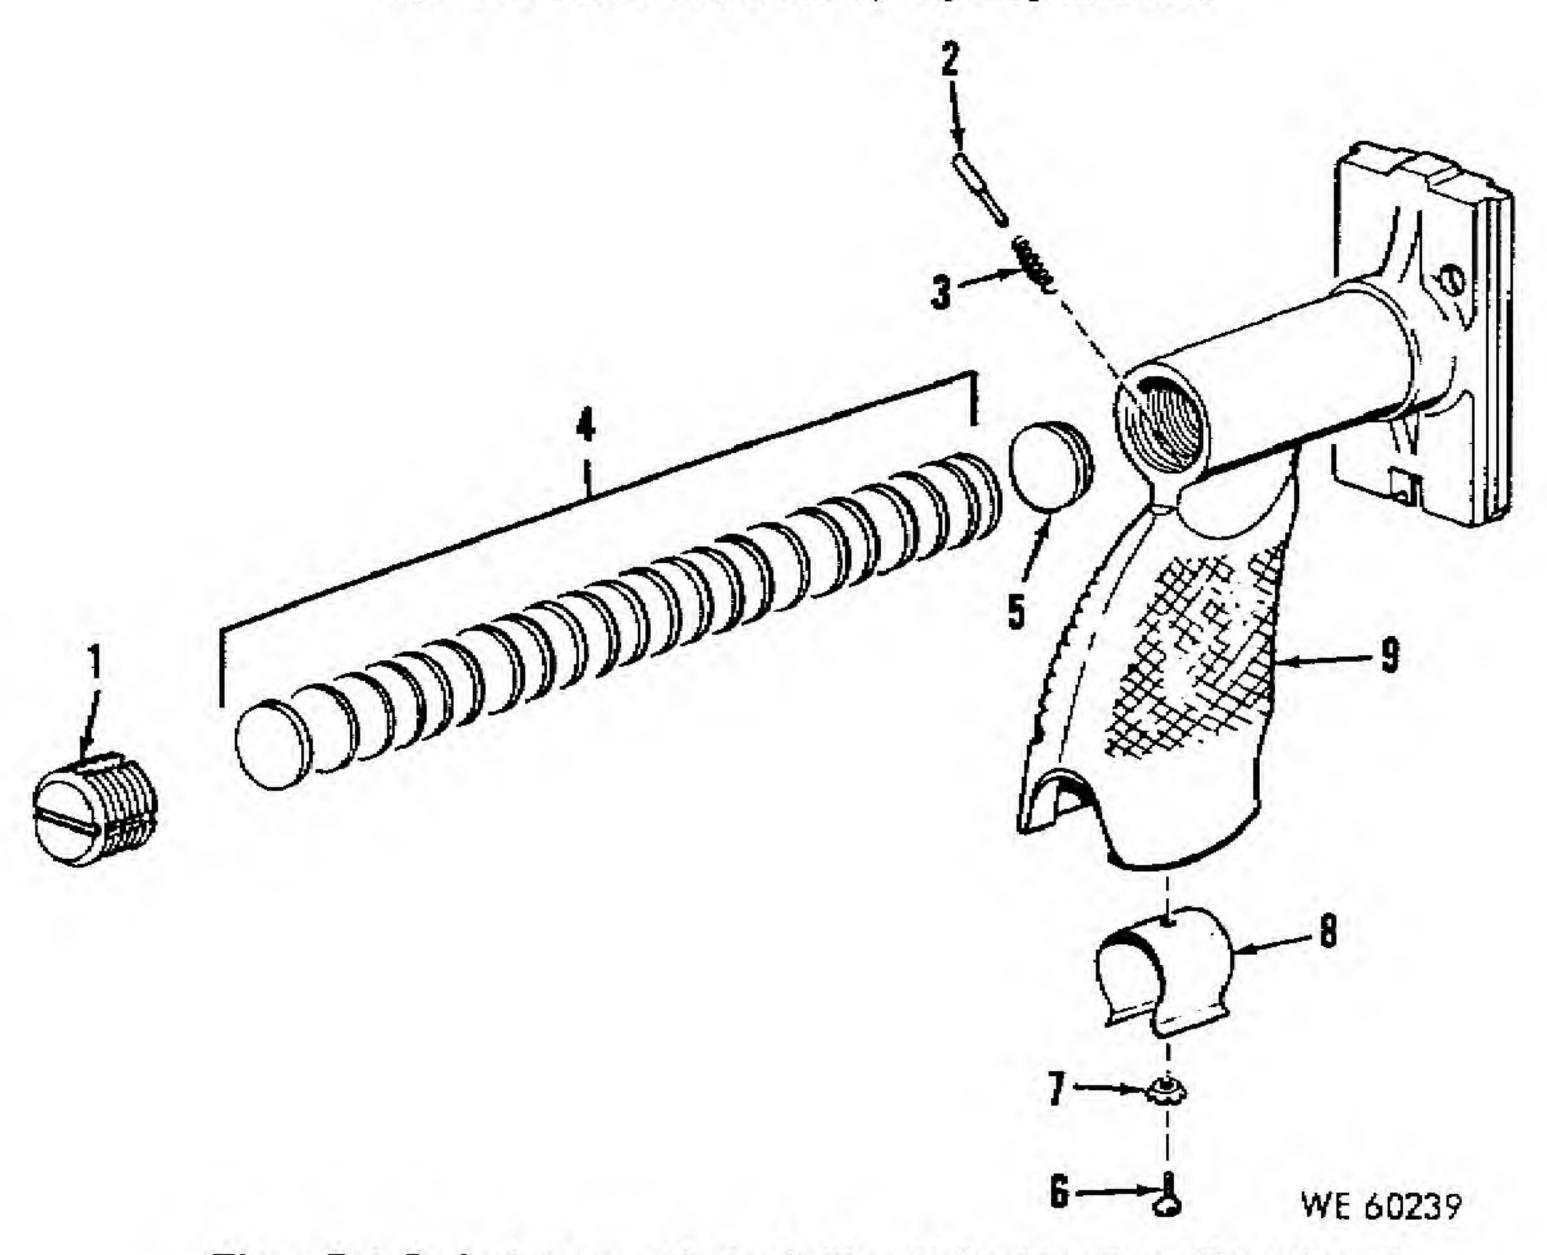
Back plate assembly for Caliber 30 Machine Guns, M1919A4 and M1919A6 only—exploded view.
